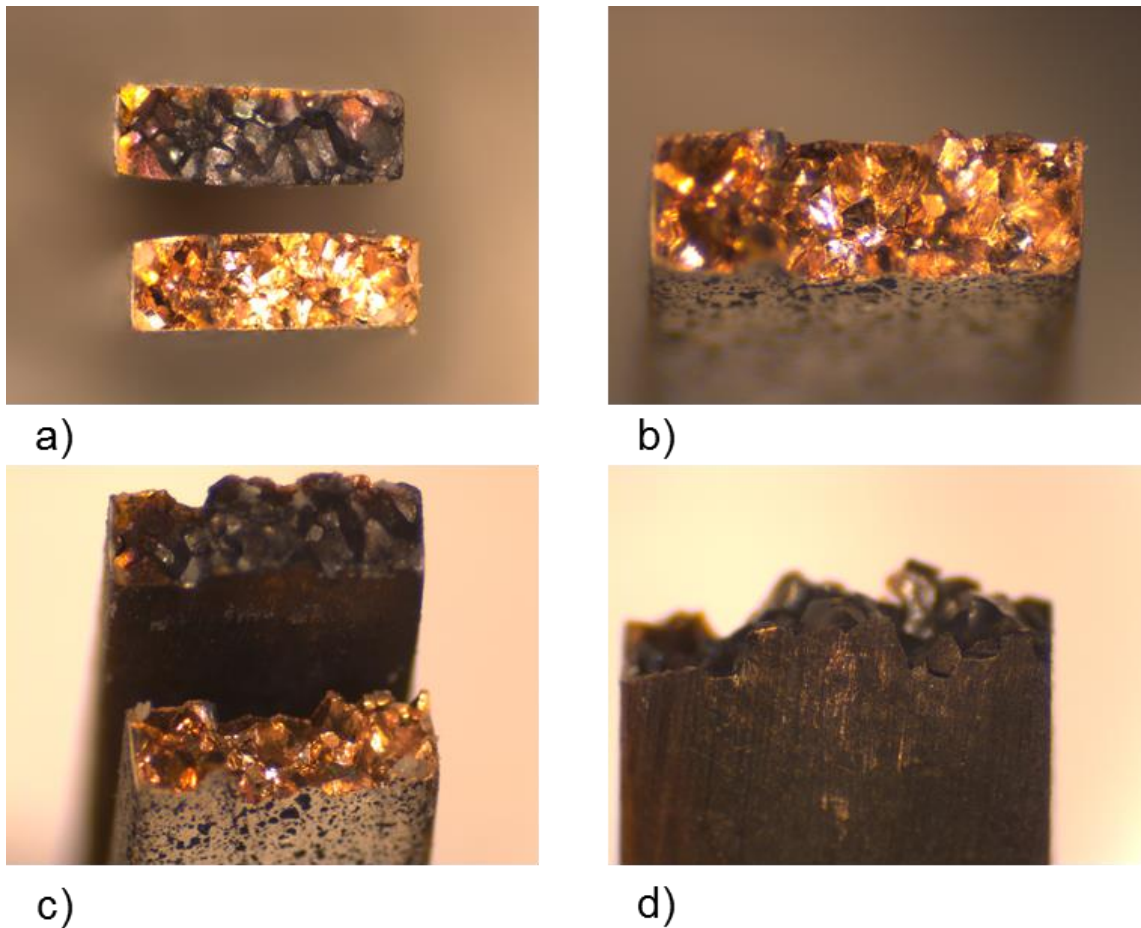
Fracture surfaces of intergranular crack failure of Au80Cu20 ETMT test specimen. Failure occurred prior to plastic yielding at 400°C
